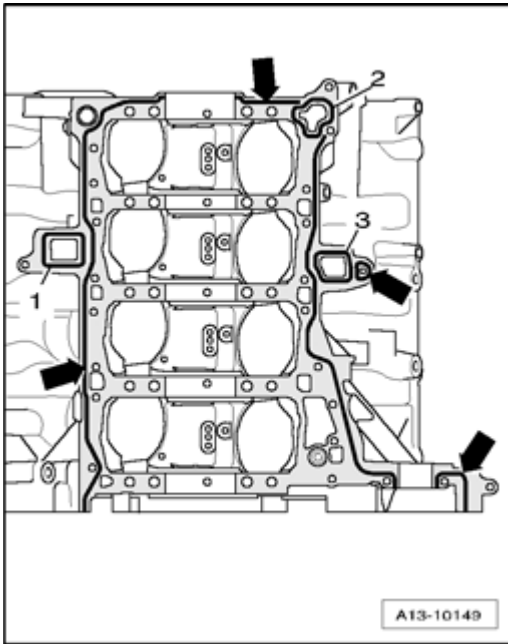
Sealant Applied On Cylinder Block (For Guide Frame)
